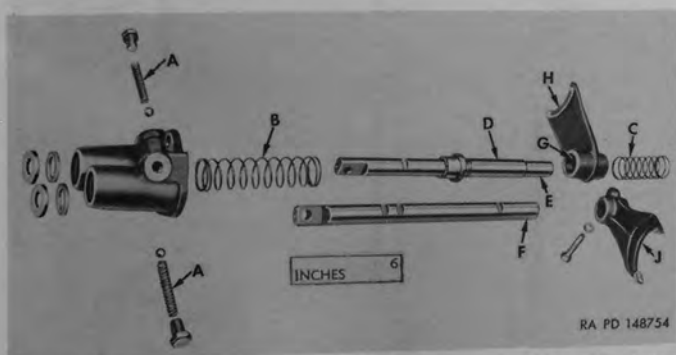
Repair and rebuild standard points of measurement for transfer shifting mechanism.
